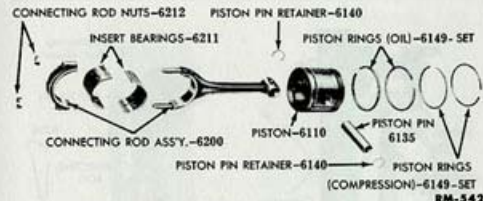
Connecting Rod and Piston Assembly, Disassembled
